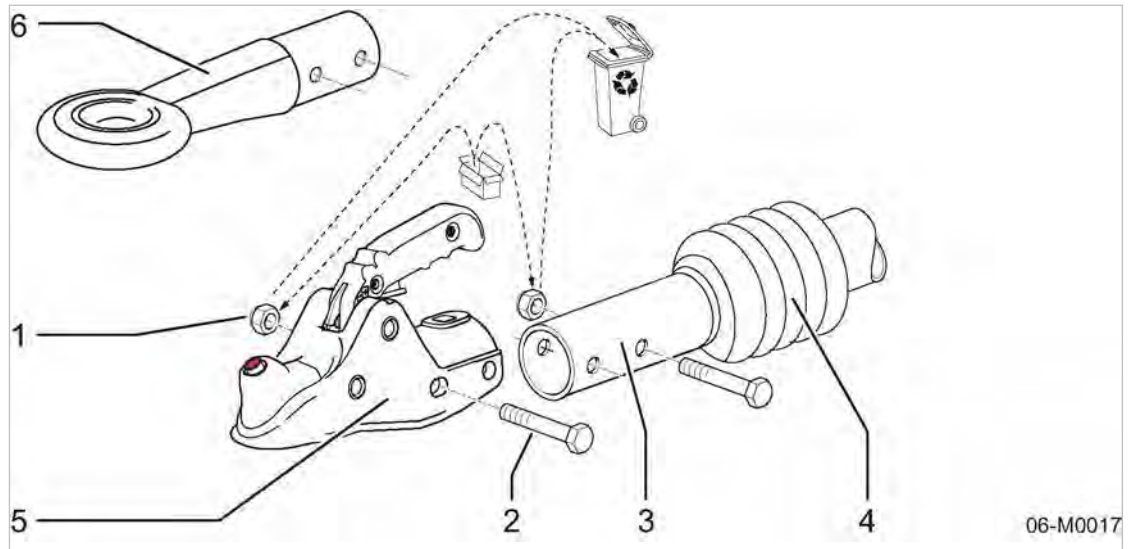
Changing the towing eye/ball hitch (height-adjustable drawbar)
